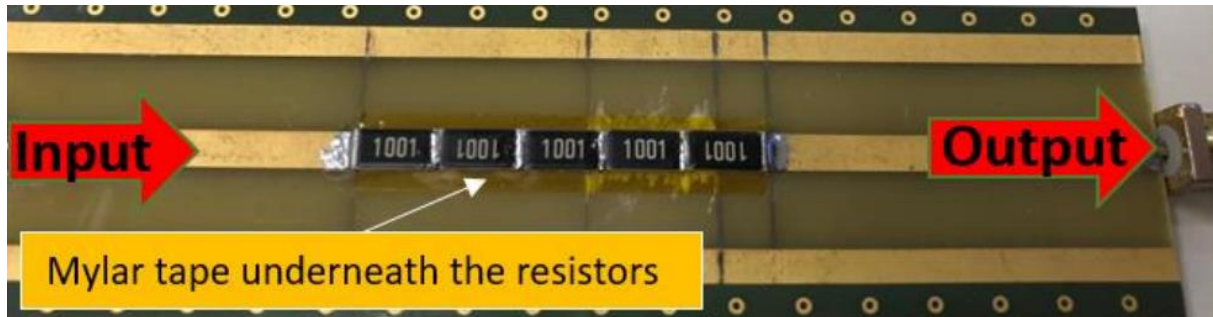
Fabricated high-resistance voltage probe consisting of five 1 k $\Omega$  SMD resistors (2512 package) soldered in series on a microstrip transmission line. The design implements capacitive balancing through optimized PCB geometry to achieve a flat frequency response and 3 GHz bandwidth [59].
